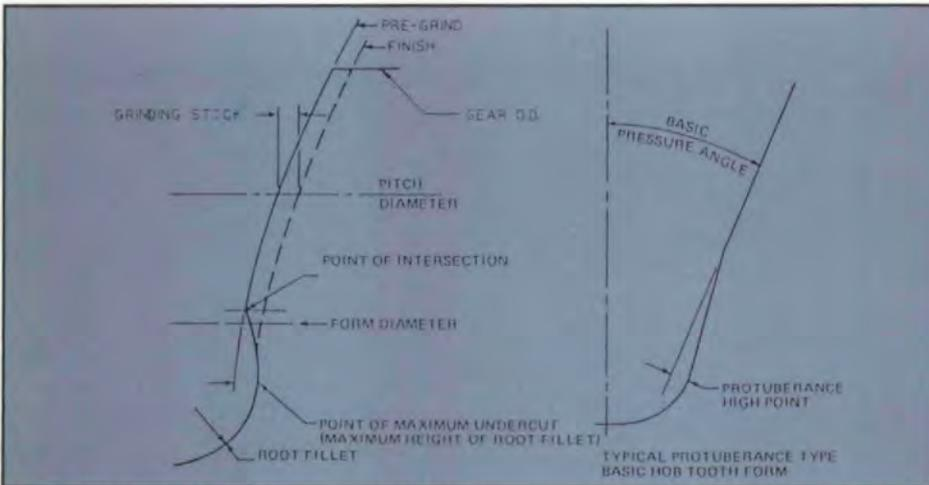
Undercut produces by a pre-grind hob and a protuberance type hob.
